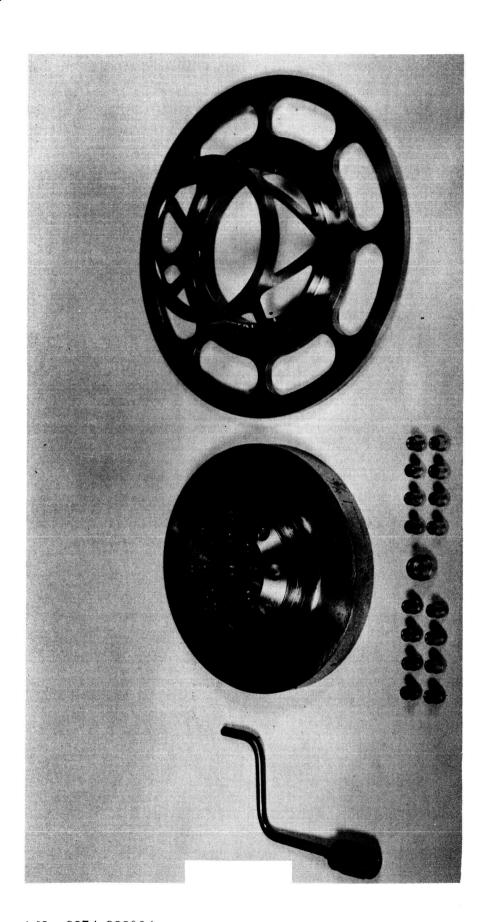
, 100-lb Injector Prior to Electron Beam Welding
